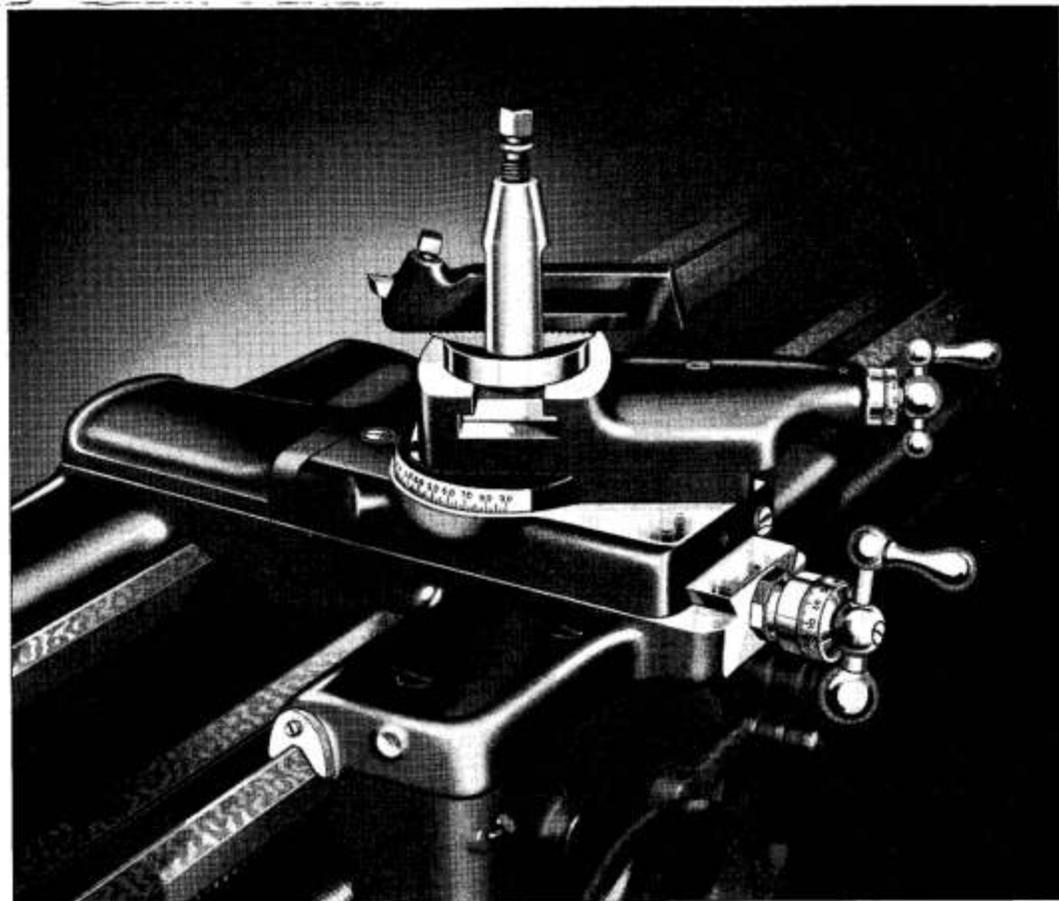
Improved Saddle and Compound Rest for South Bend Lathes
